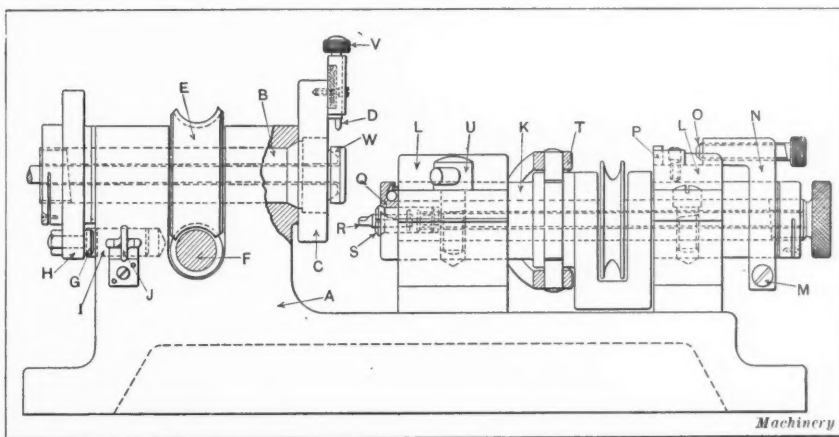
Special Machine designed for cutting Powder Grooves in Time Fuse Rings for Shells
